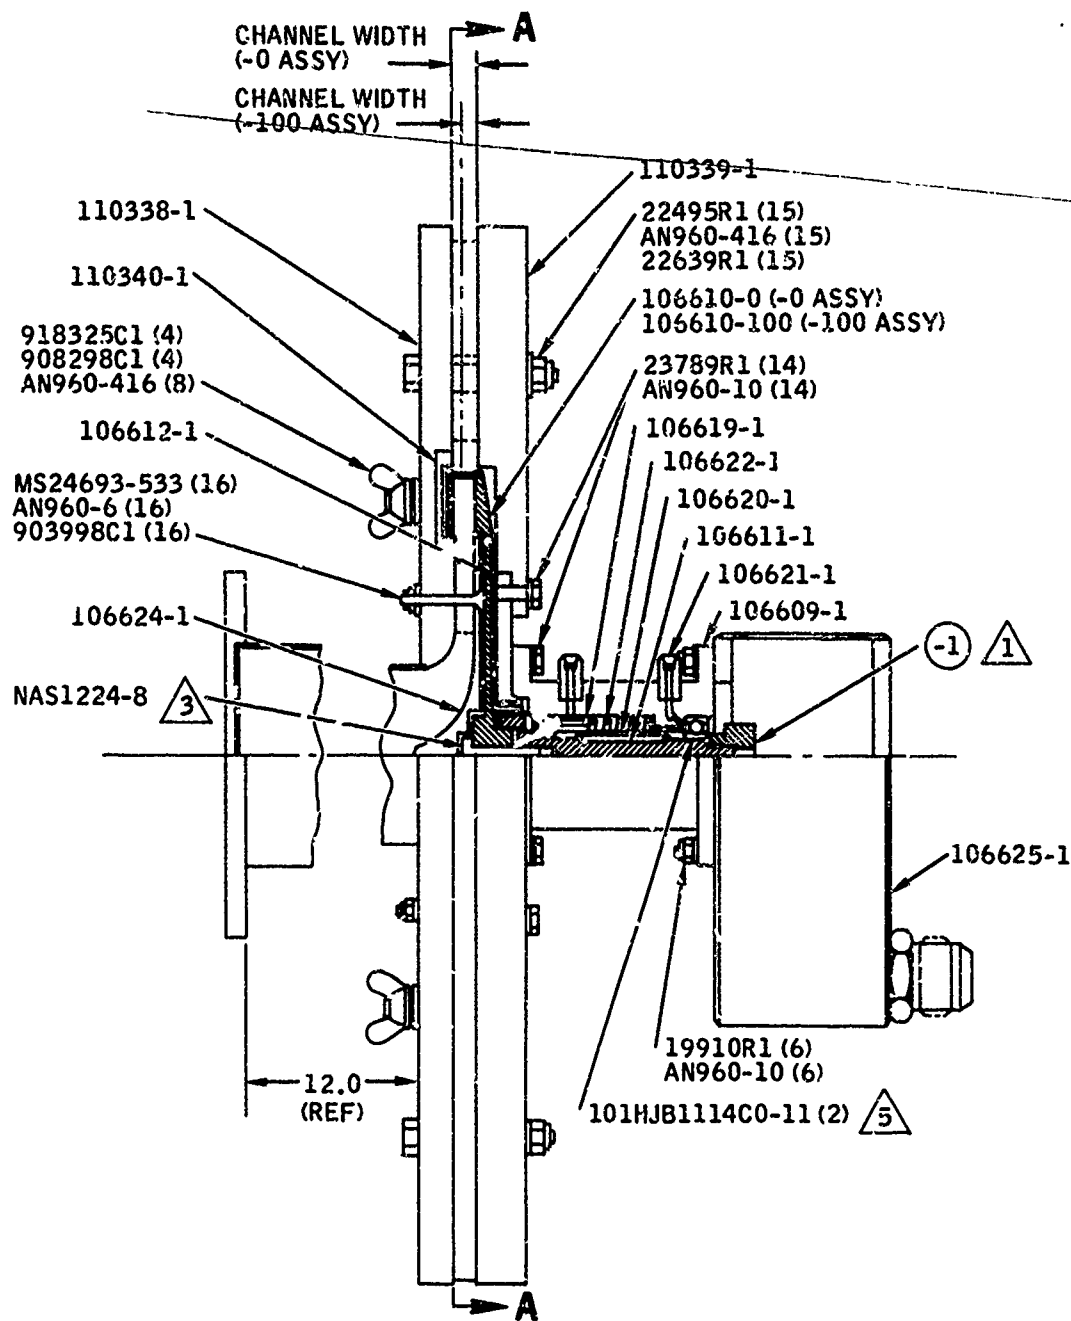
Rotating Vaneless Diffuser Test Rig Cross-Section View
